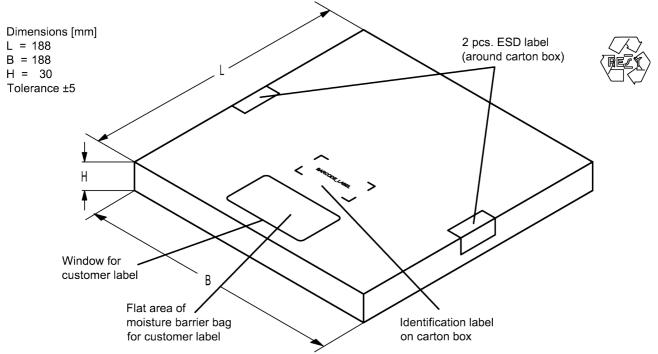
Drawing of folding box for reel with diameter of 180 mm.
